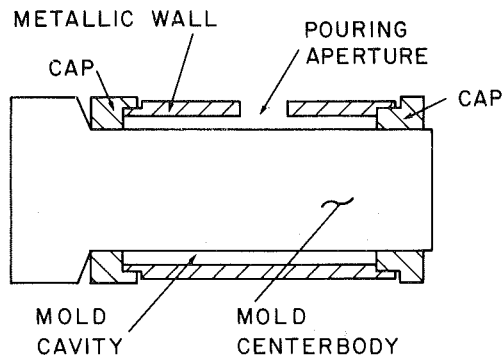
Setup for forming a naphthalene coating on the inside of a circular tube
